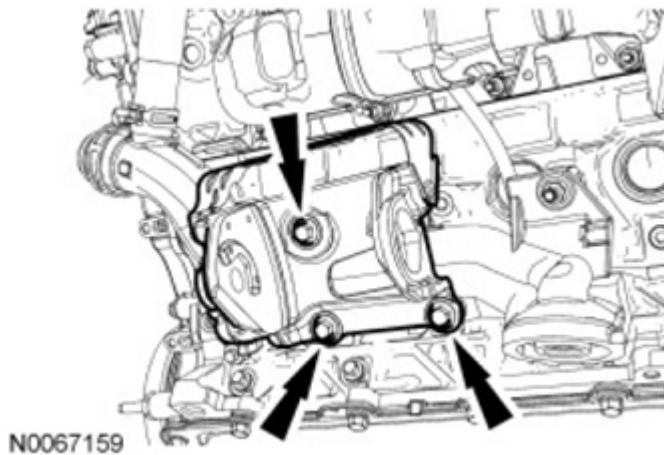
Locating LH Engine Support Insulator Bracket And Bolts
